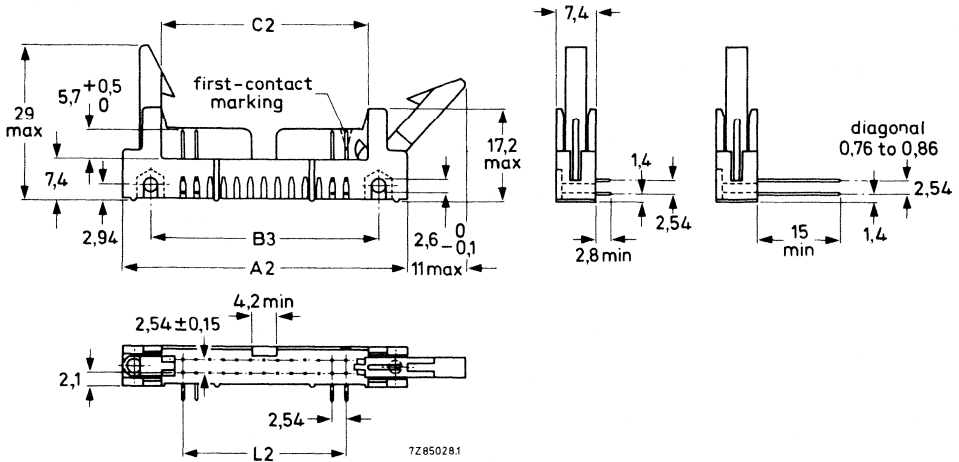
Male header with clamp/ejectors, with 90°-angled dip-solder pins and pins for wire wrapping respectively; for dimensions A2, B3, C2 and L2, see Table 4.
